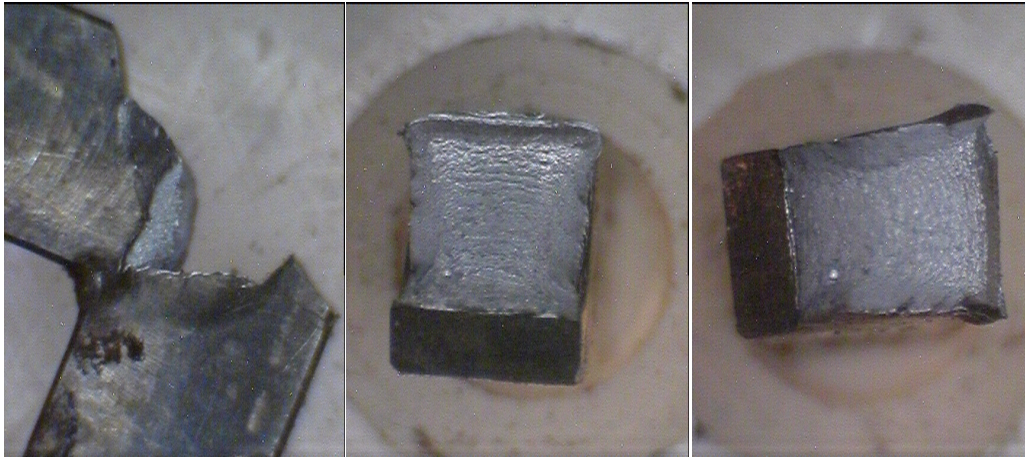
Tested impact specimens C 165, C 166, C 167 after testing (Macro) and after complete breaking (Macro)
